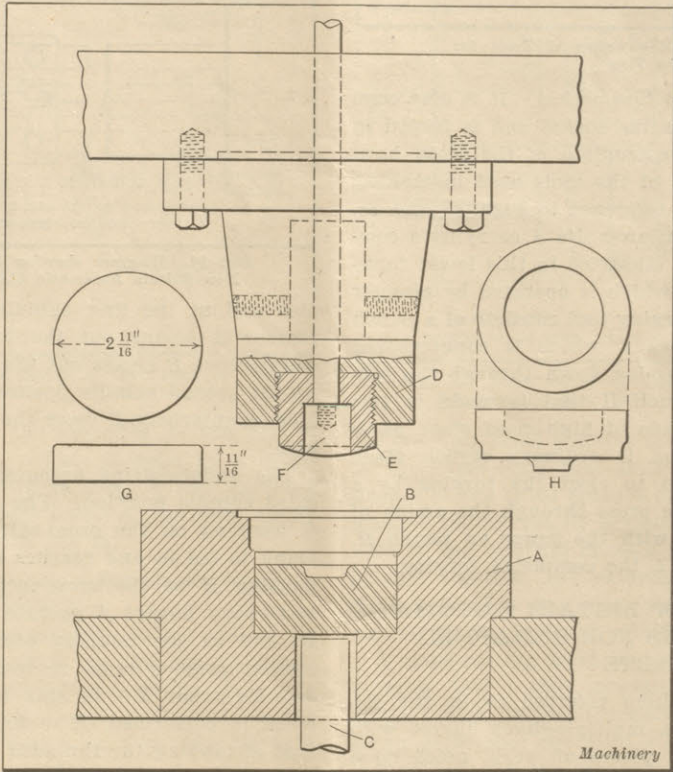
Diagram showing Construction of Tools used in forging Fuse Socket
